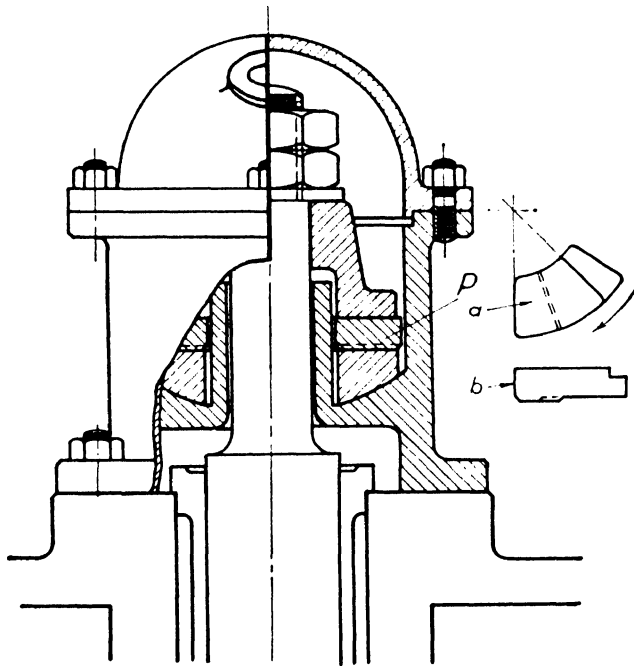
Pivoted-pad thrust bearing for vertical shaft
